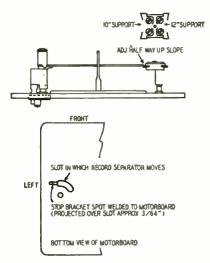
Drawings showing the top of the record support, the front view, and the left-hand underside of the motorboard of the type RP-176 changer.
